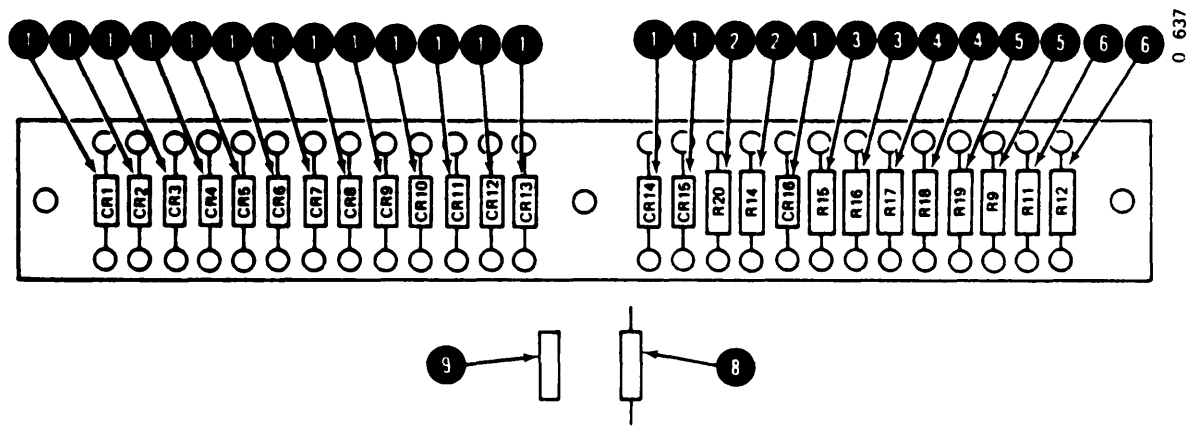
BOARD ASSY TBI COMPONENT PARTS
